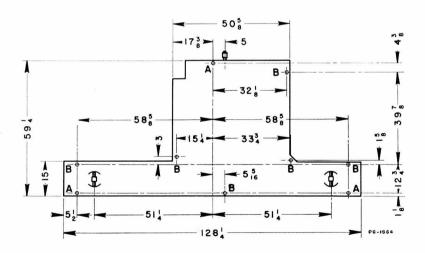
Location of Leveling and Aligning Screws 10" x 48" Machine
